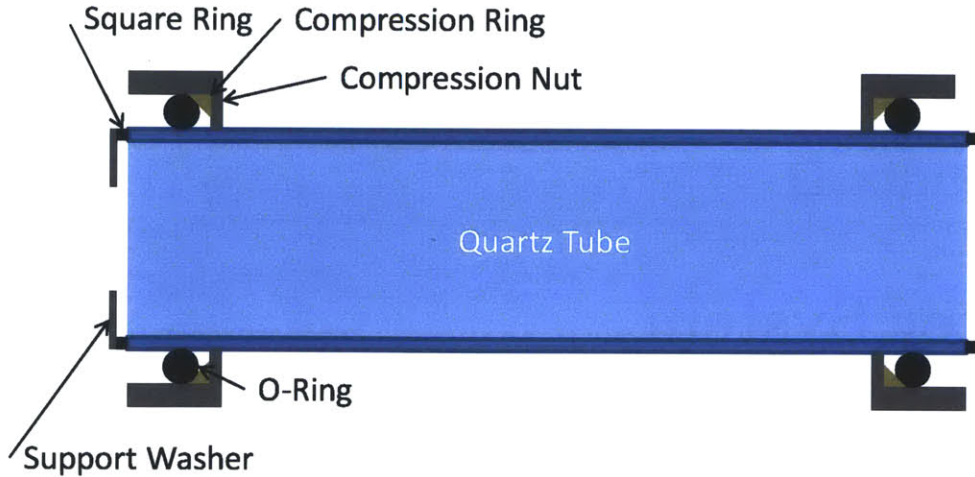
Cross section of the growth chamber without heater support installed. Note that the vacuum fittings that this assembly mounts to are not shown (not to scale).
